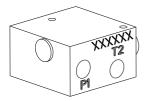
Control Valve – Part Number Location XXXXXX Above Port T2 Identified
